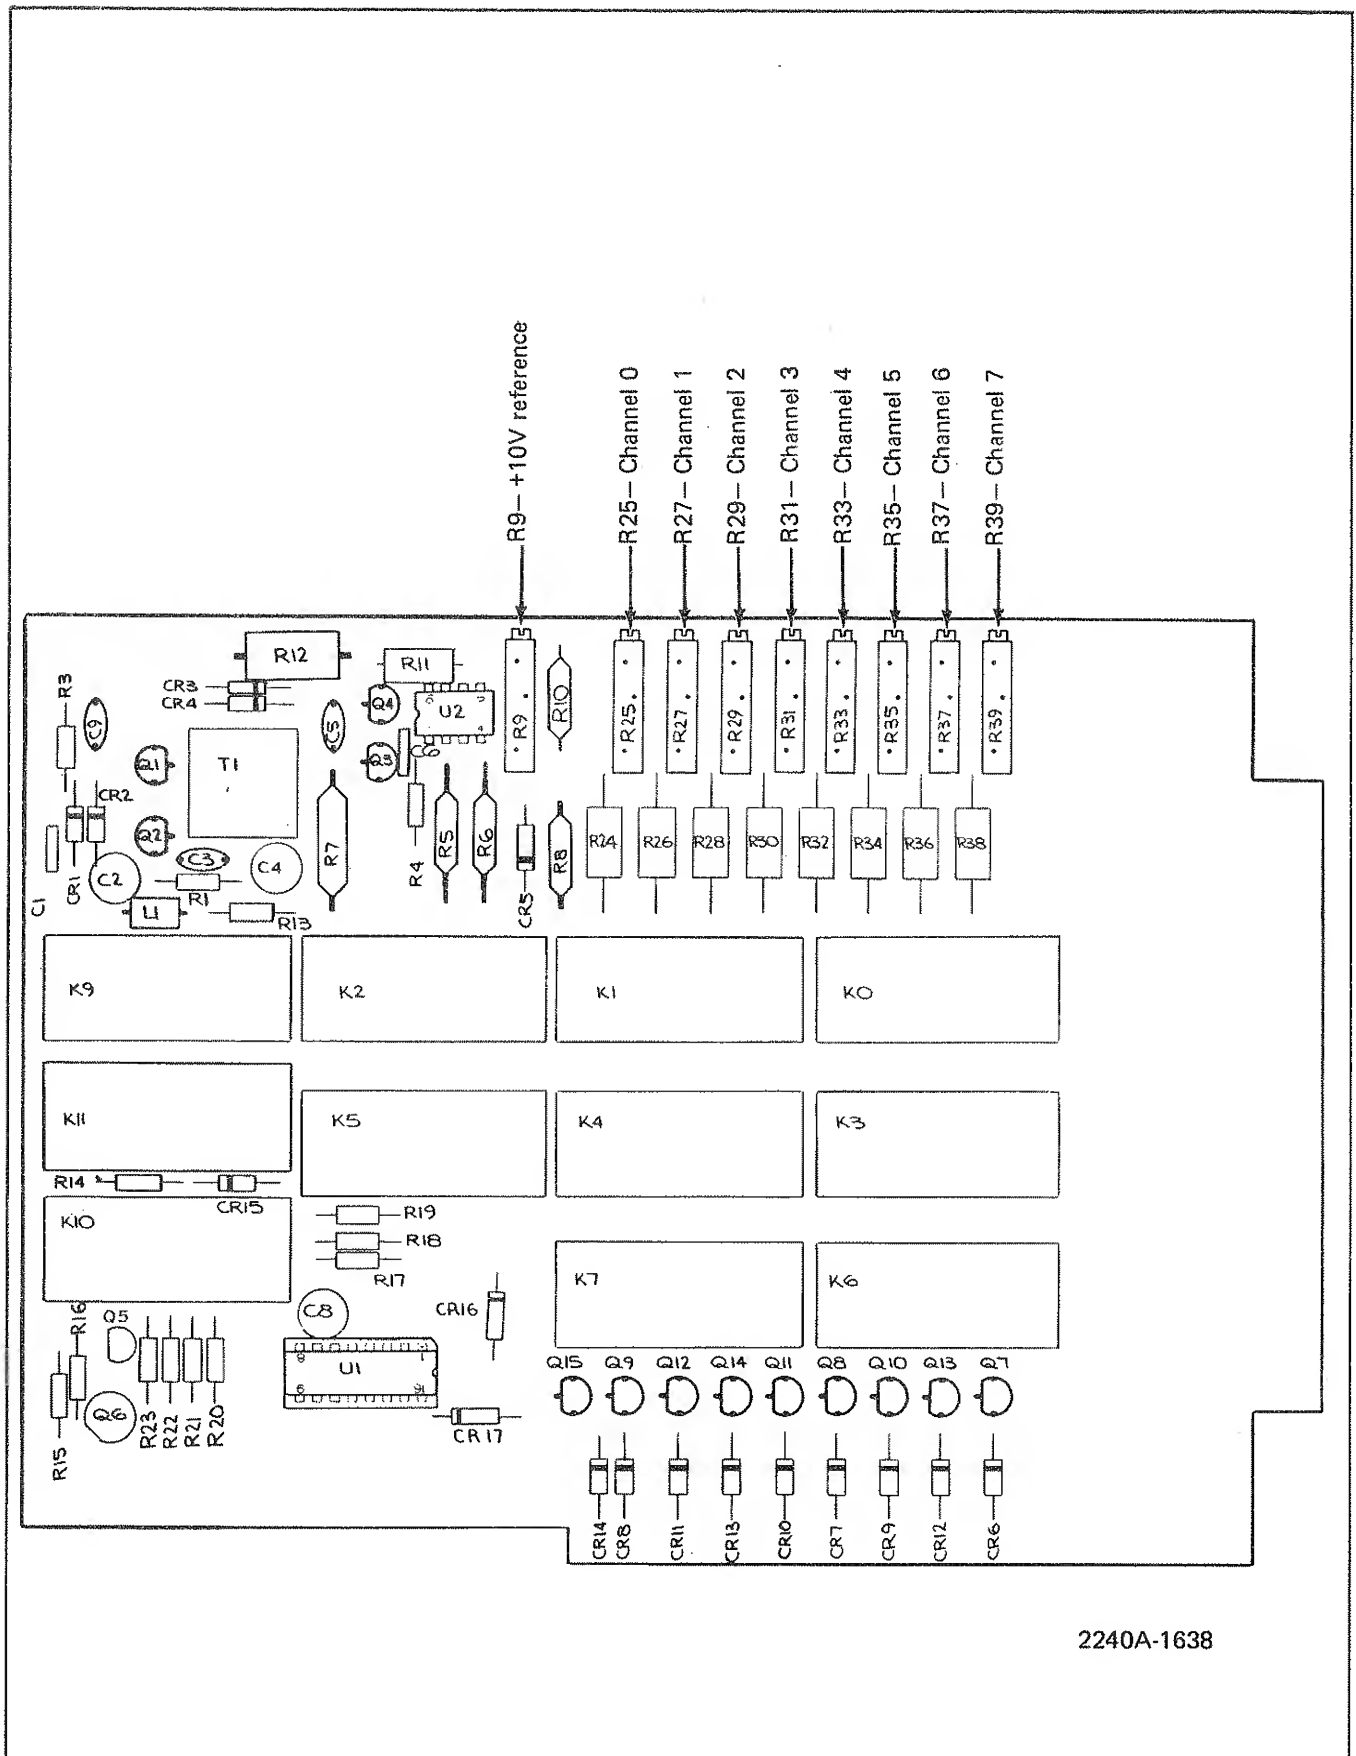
Eight Channel RTD Scanner PCB Assembly
